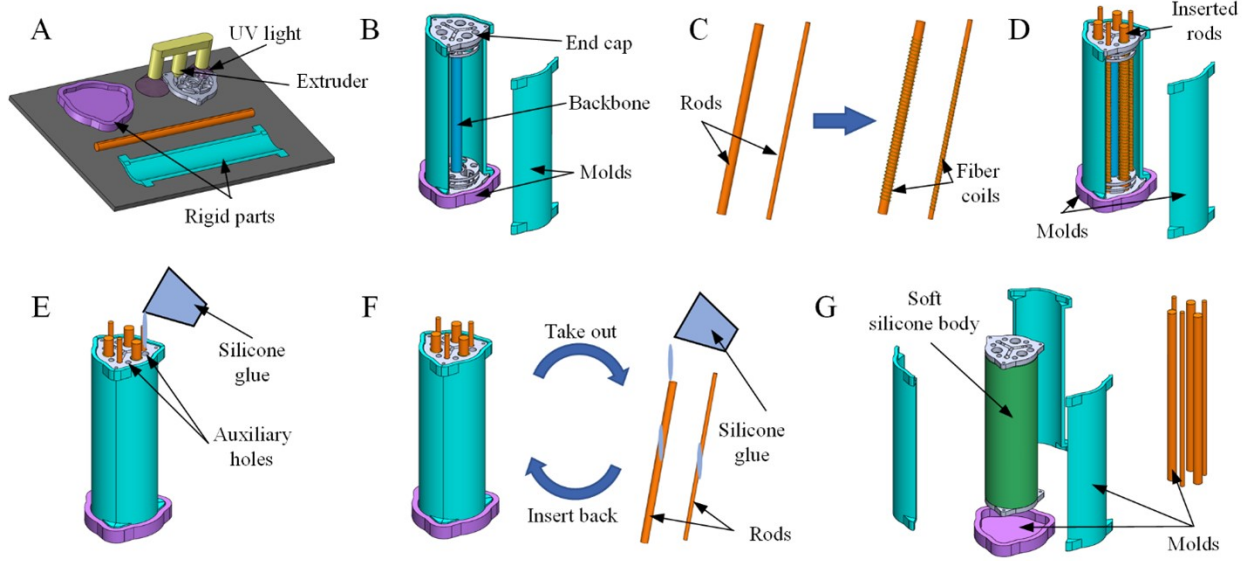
Fabrication process for one section of the soft robotic arm. (A). 3D printing of the rigid parts. (B). Assembling of mold for one section. (C). Twisting fiber coils around the rods for cavities. (D). Inserting the rods for cavities into the mold. (E). Injecting silicone glue into the mold and curing. (F). Adding another layer of silicone glue to the inner surface of the cavities. (G). Removing the mold and getting one section of the soft robotic arm.
